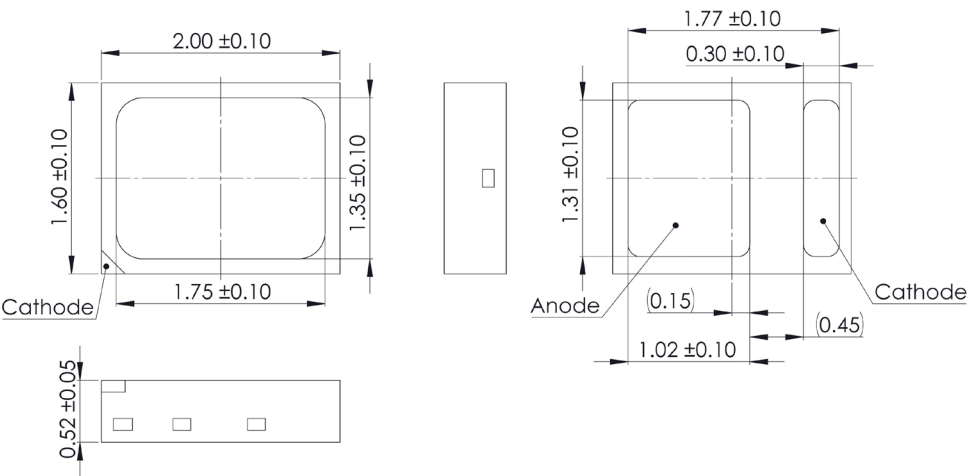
Mechanical dimensions for LUXEON Versat 2016 60 2790
